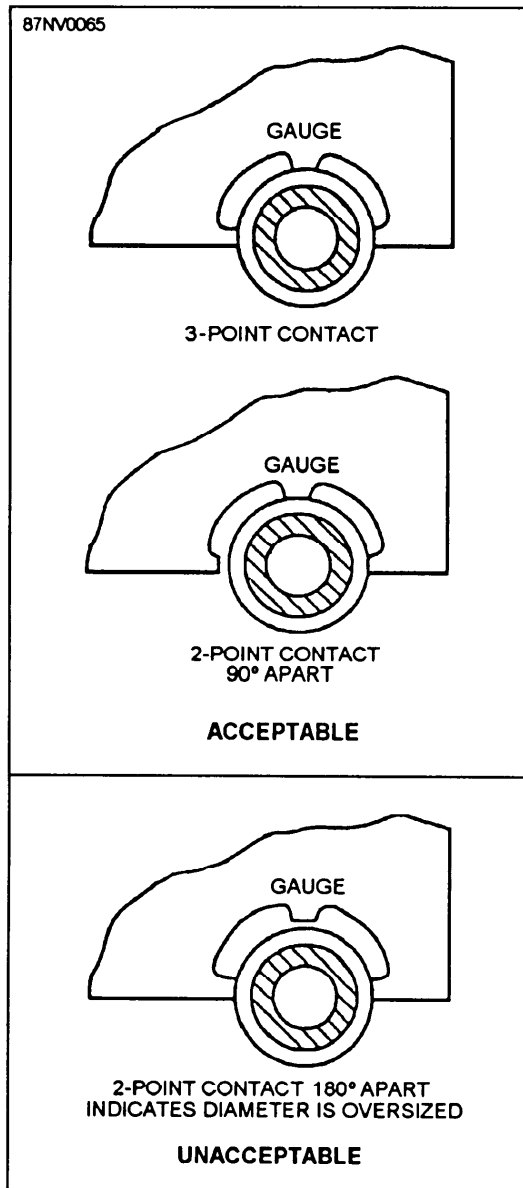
Using marking/inspection gauge for pipe/tubing verification.
